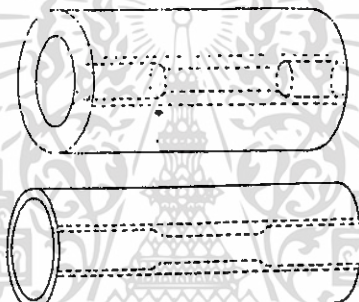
Squeezing Jig for Flattening Ends of Full-Size Tension Test Specimens
